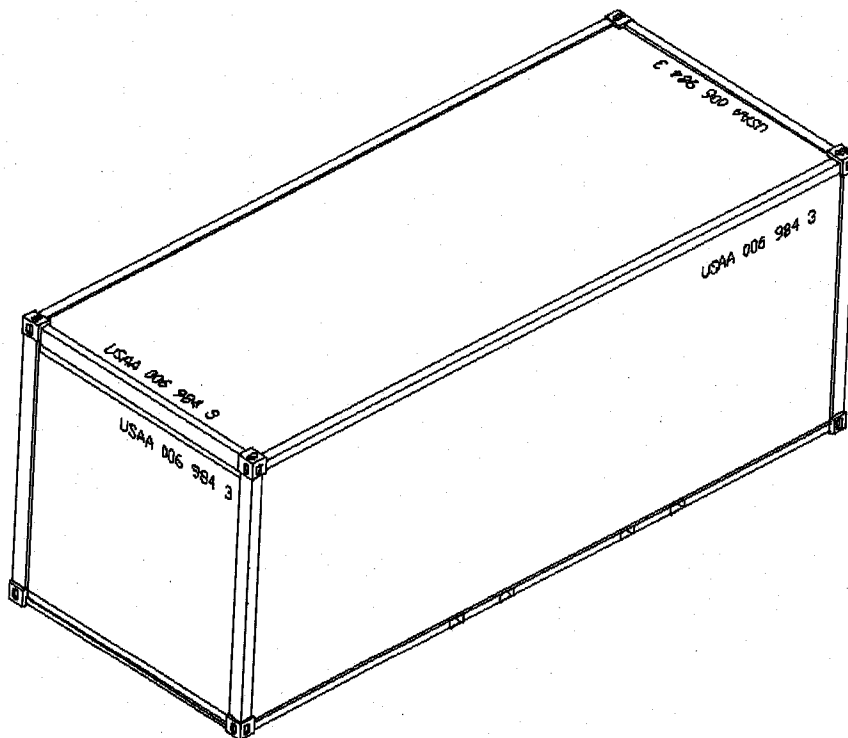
B - TYPICAL HORIZONTAL LAYOUT OF ISO IDENTIFICATION MARKINGS
